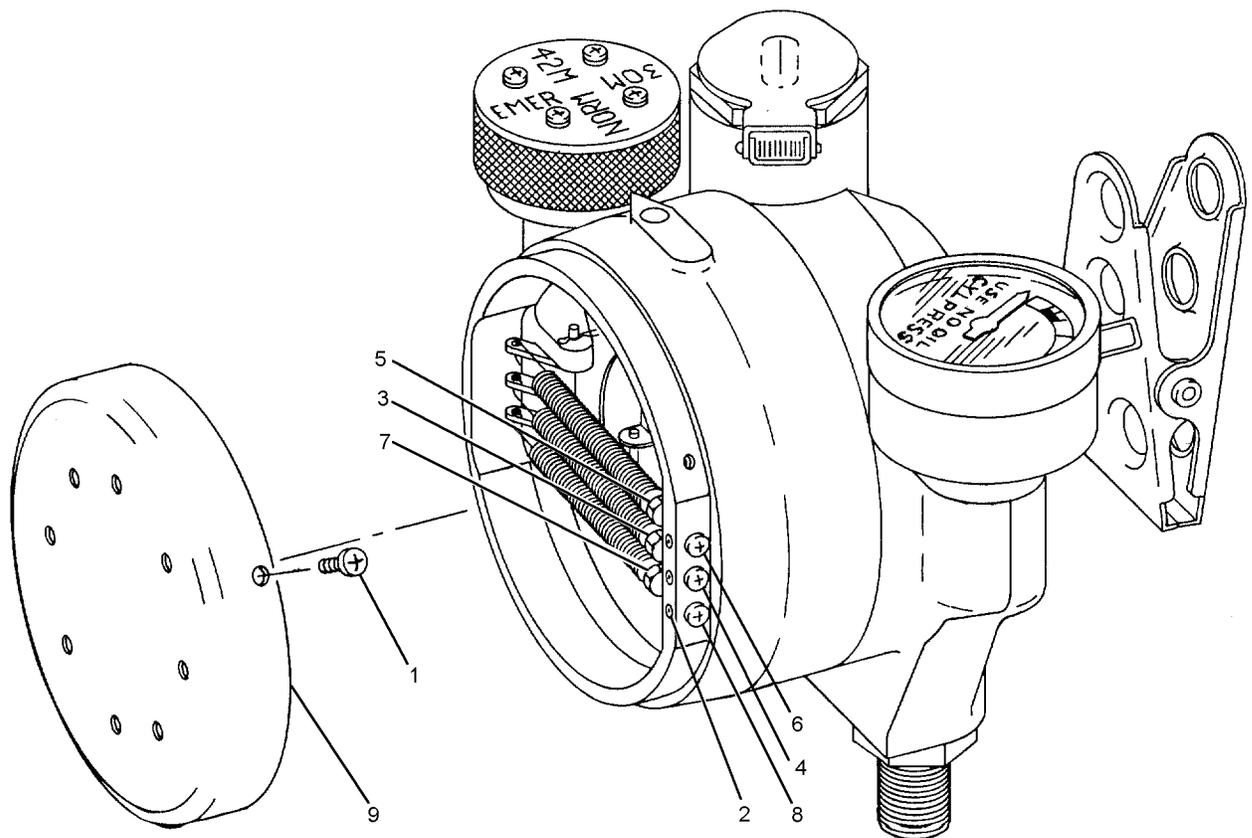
Adjustment of 30M, 42M, and EMER Springs
